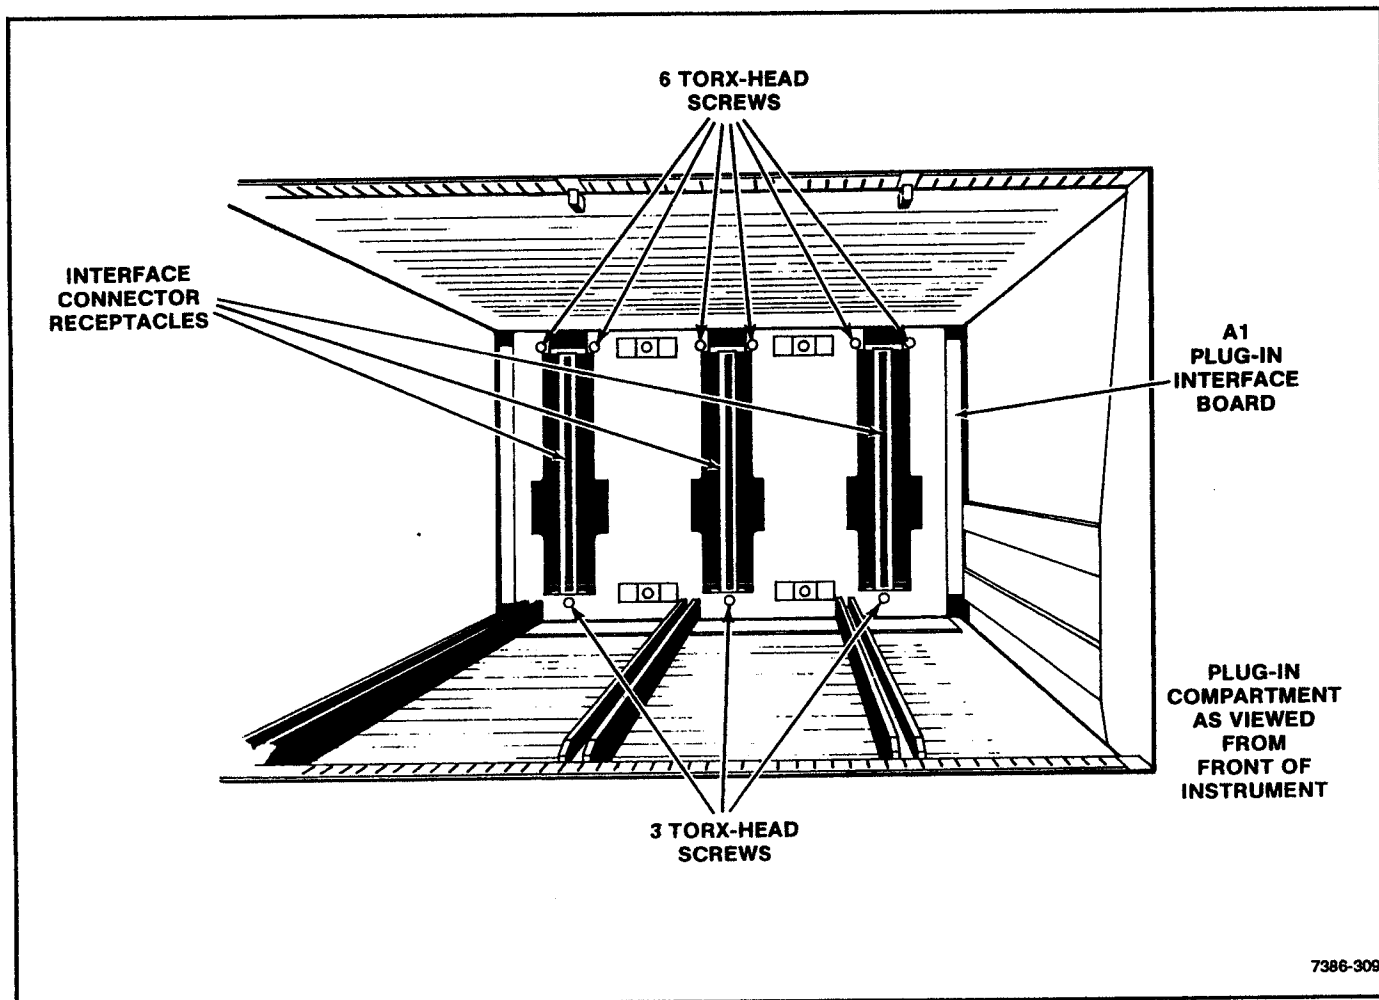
Plug-in compartment showing mounting screws for the A1 Plug-In Interface board.
